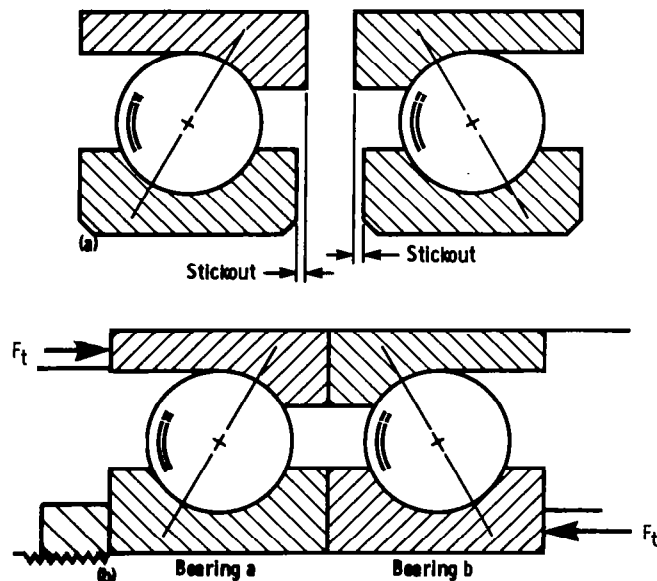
Angular-contact bearings in back-to-back arrangement, shown individually as manufactured and as mounted with preload. (a) Separated. (b) Mounted and preloaded.
